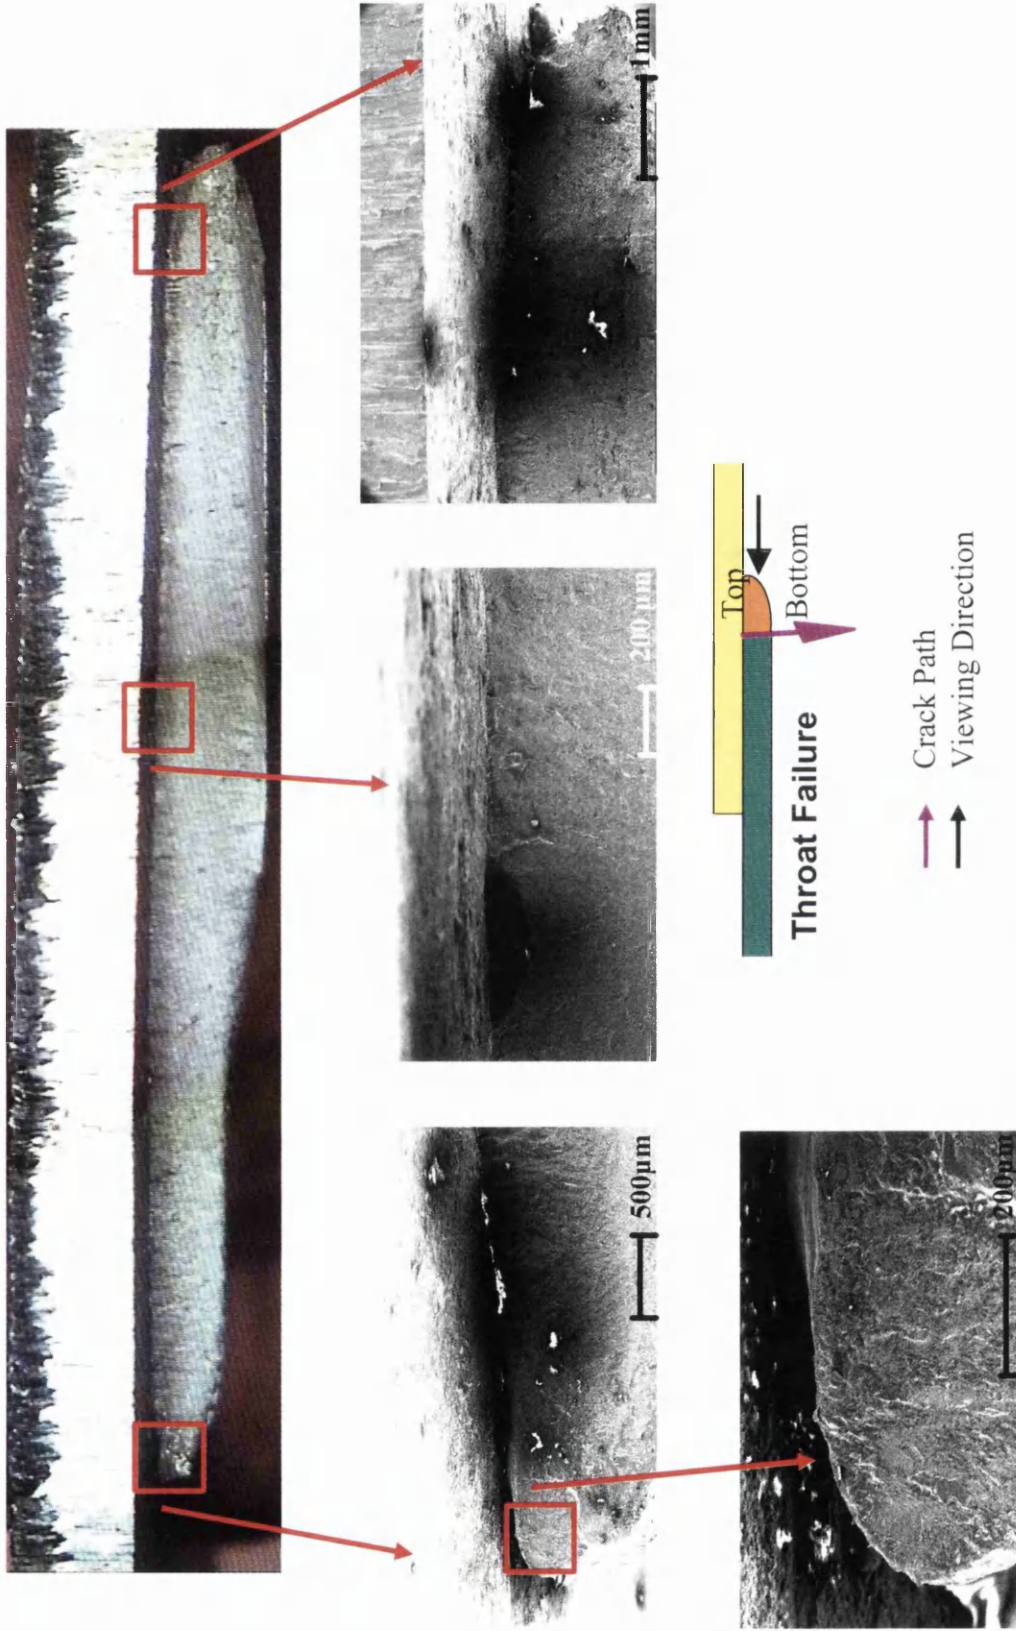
Typical Fracture Surface for GM1 Weld Throat Failure – Weld View
